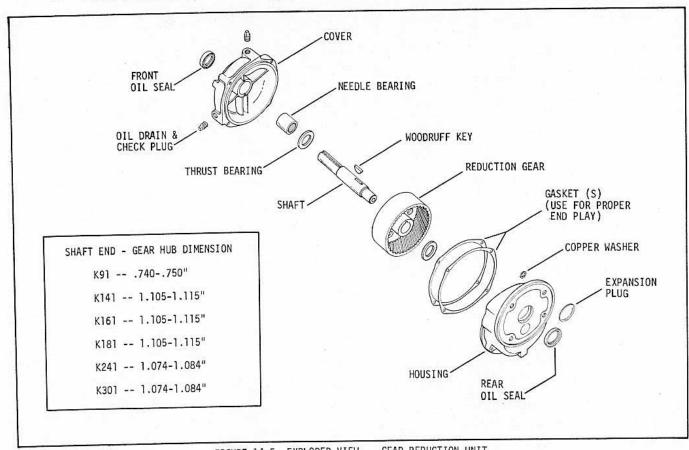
EXPLODED VIEW -- GEAR REDUCTION UNIT
